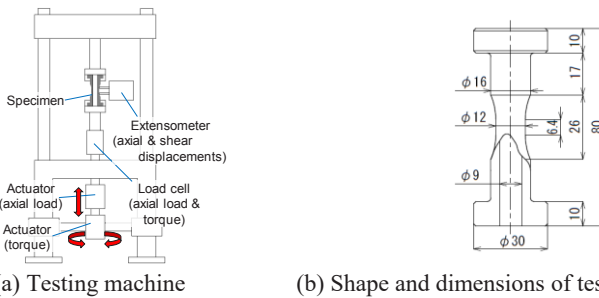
Testing machine and test specimen of push-pull and reversed torsion.
